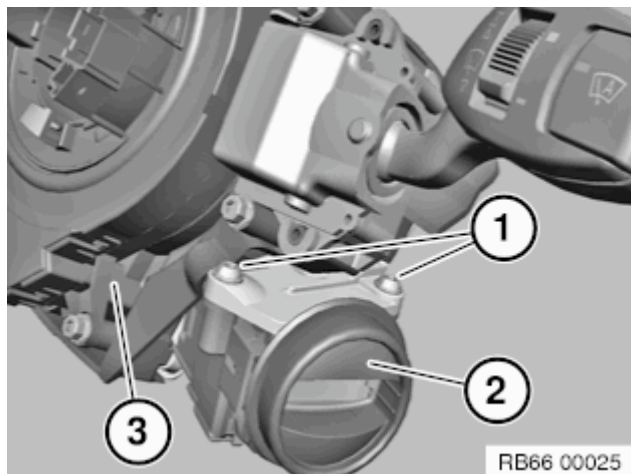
Removing Radio Operated Key Insert From Steering Column Switch Intake
